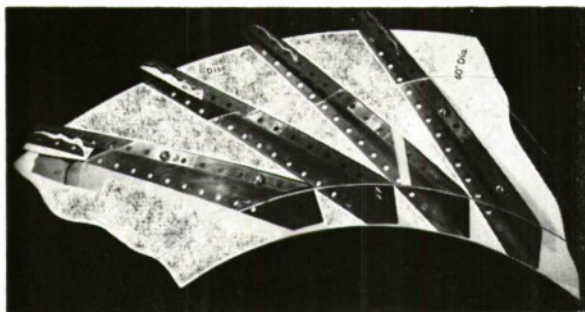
Failure of impeller vanes in compressor/exhauster.
